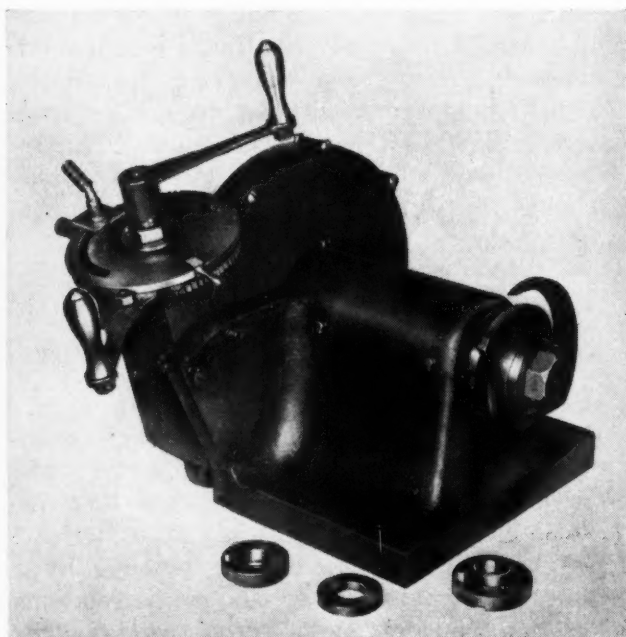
Special Dividing Head for Milling Cams without the Use of a Master or a Lay-out on the Cam Blank
